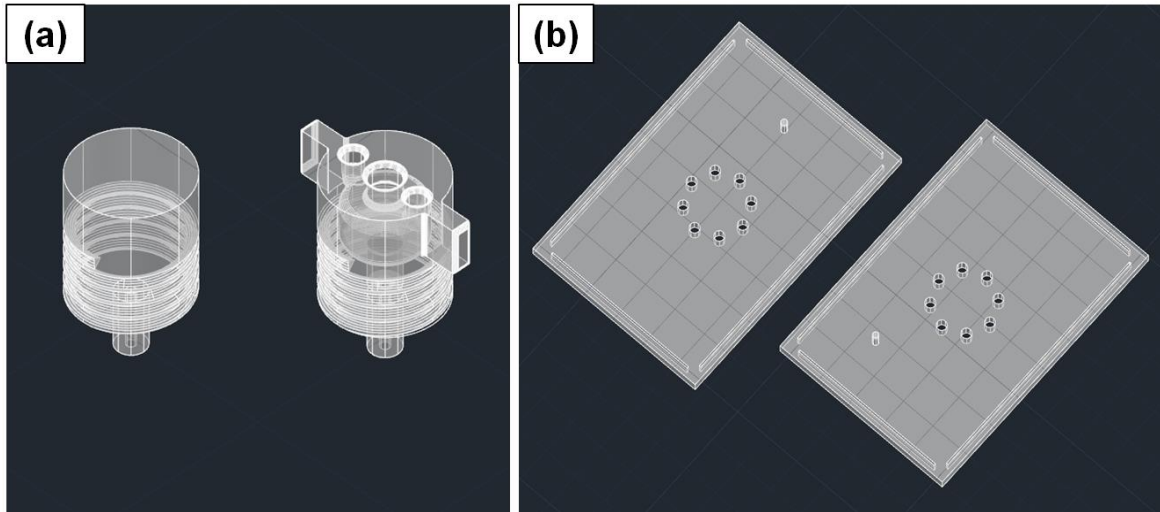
Designs for (a) fitting to be installed on the bars of the holding frame, and (b) measuring sheets to cut the PDMS slabs according to the holding frame structure.
